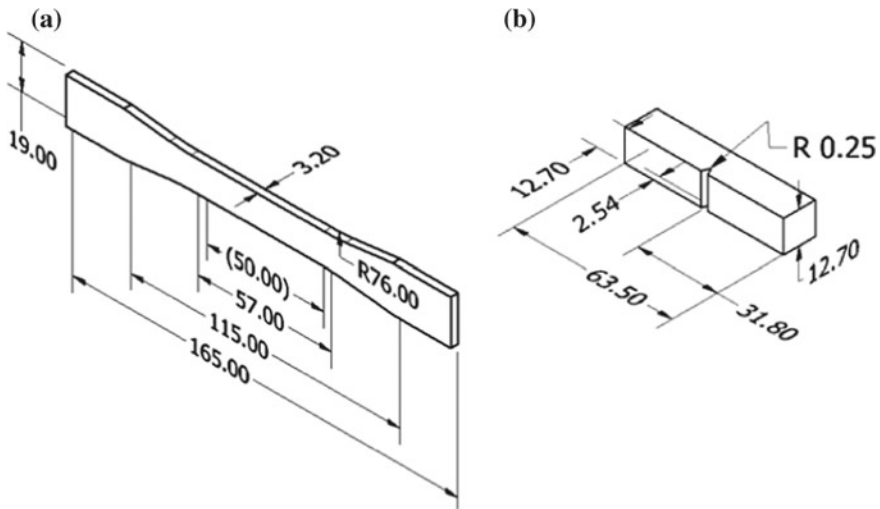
Test specimens a tensile specimen as per ASTM D638 and b impact specimen as per ASTM D256 (all dimensions are in mm)
